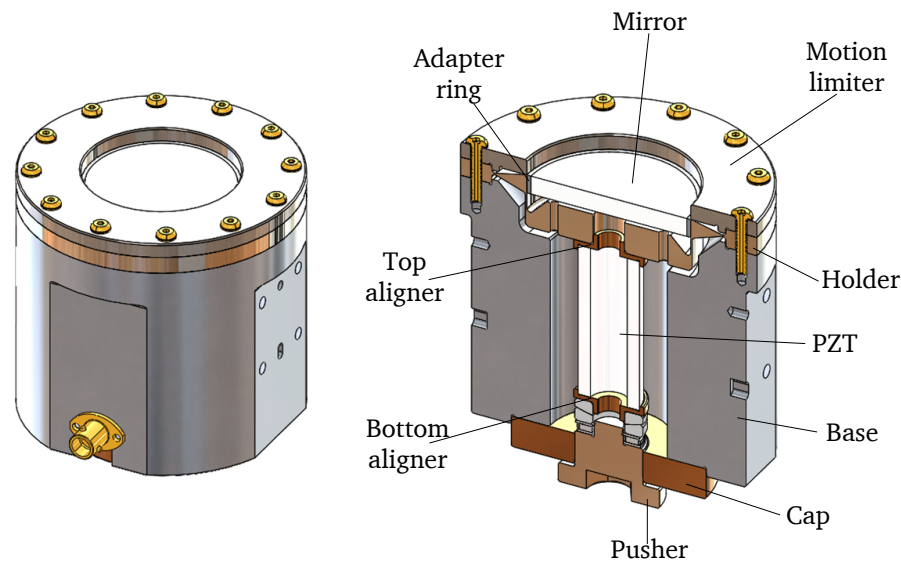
Drawing of the assembly of the piezo-driven deformable mirror and its cross-section [155].
